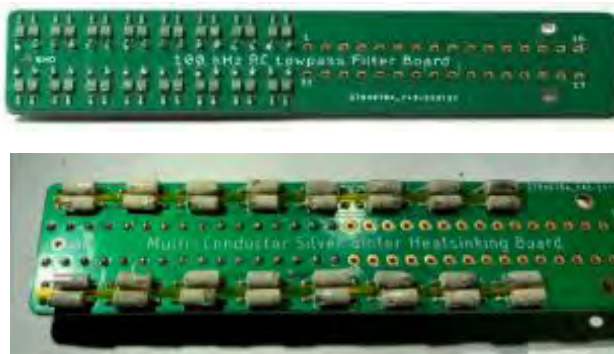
Top picture showing RC filter PCB. Bottom picture showing sinter filter PCB.
